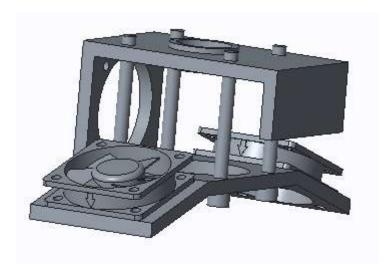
Image with the assembly of the layer fans support with the four bolts and the extruder support.
